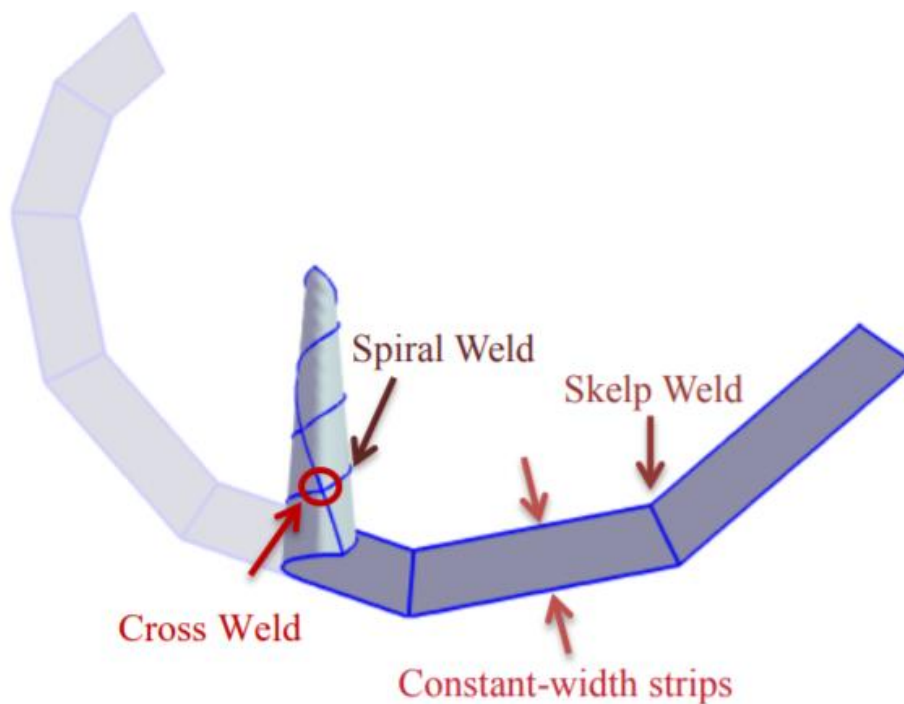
Geometry of a rolled and un-rolled conical tubular tower that has been manufactured via spiral welding. [27]
